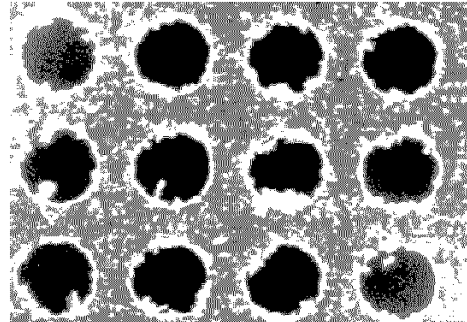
Tiny burrs after minute hole machining on the thin Invar sheet by laser (Hole diameter : 100 μ m Thickness : 30 μ m)
